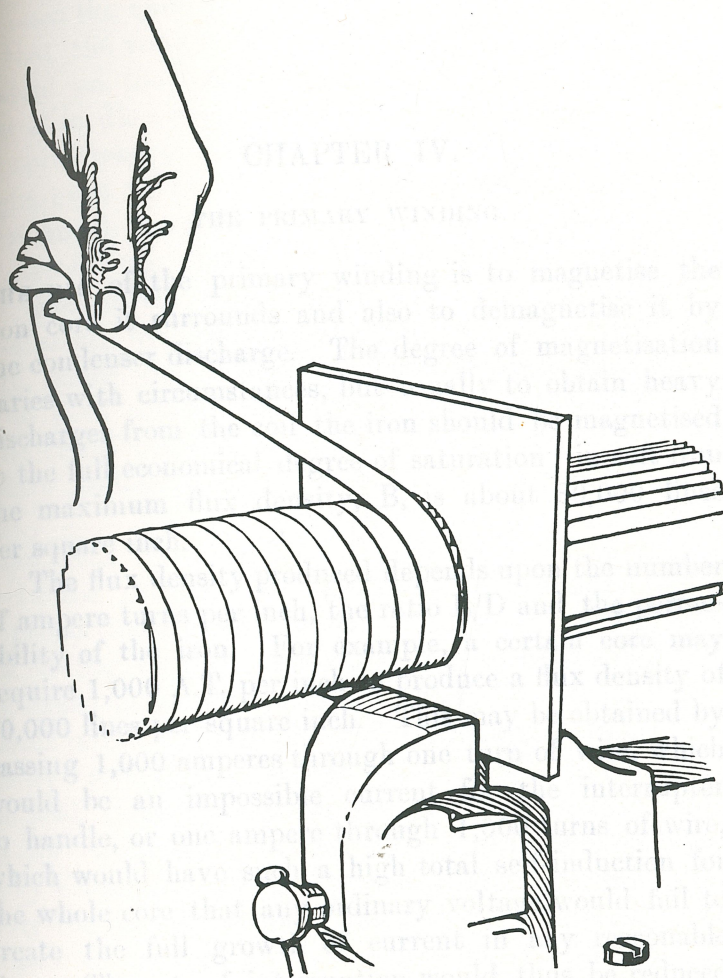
Showing method of taping core after forcing through a gauge plate.
